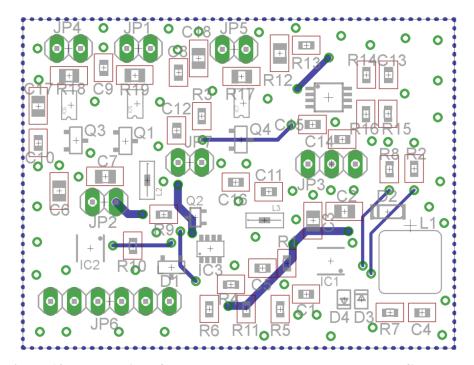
Bottom side of the solar panel controller prototype PCB layout.
